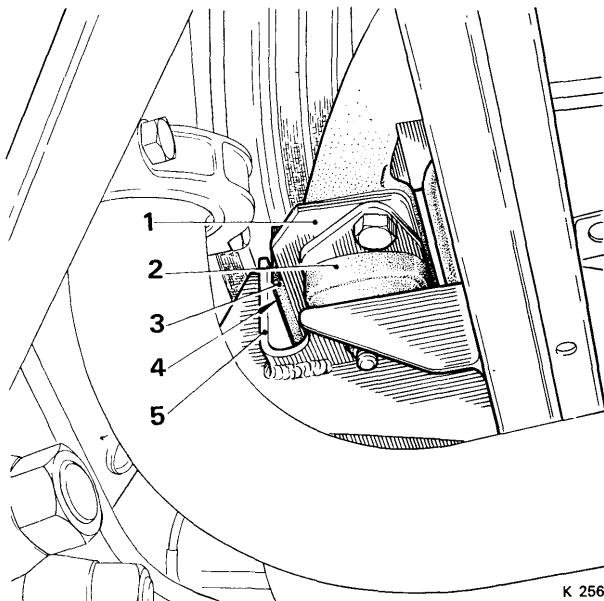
ENGINE MOUNTING - Front Stop Plate Gap
